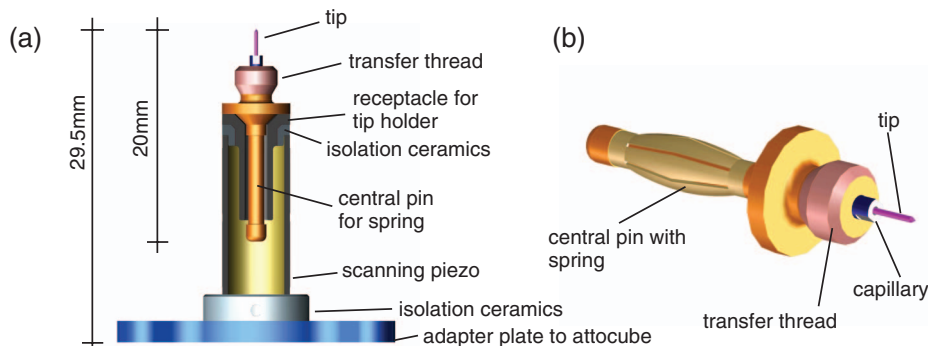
Scan assembly. (a) Scanning piezo is attached to the adapter plate via an insulation ceramic. It carries the receptacle for the tip holder. The whole scan assembly is mounted to an attocube coarse motor (not shown). (b) Close up of the tip holder.
